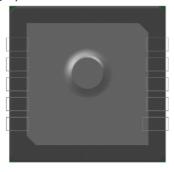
MODULE HOSTED ON FOOTPRINT
